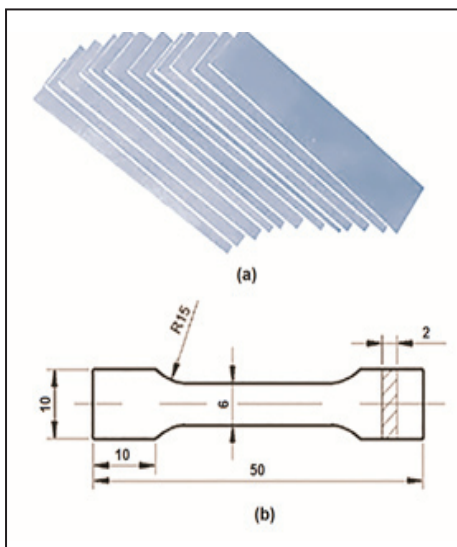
As-cast SiC/5050 Al Alloy Composites (a) 2mm Thick Specimens for Tensile Tests and (b) Shape and Dimensions of Tensile Specimen (mm).
